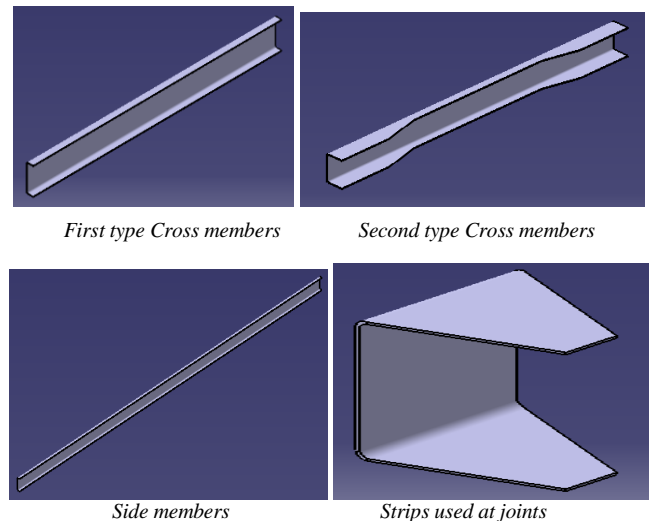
Parts of "C"- Section Chassis frame design on CATIA
